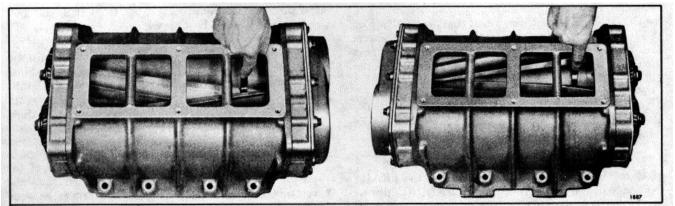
Measuring "CC" and "C" Clearances Between Blower Rotor Lobes. 10-4-17
